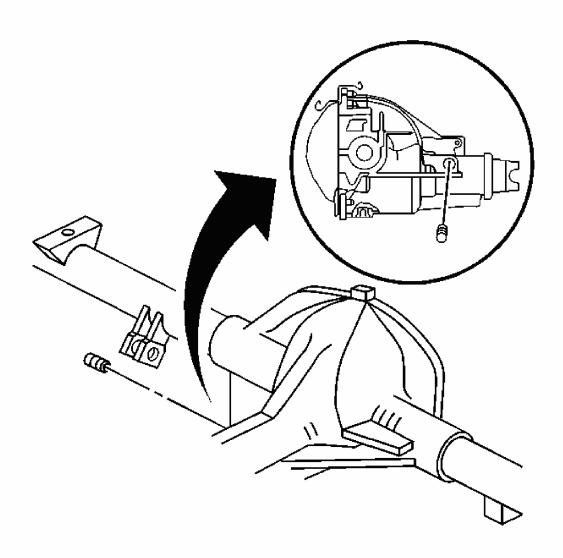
Locating Rear Axle Fill Plug Courtesy of GENERAL MOTORS CORP.
